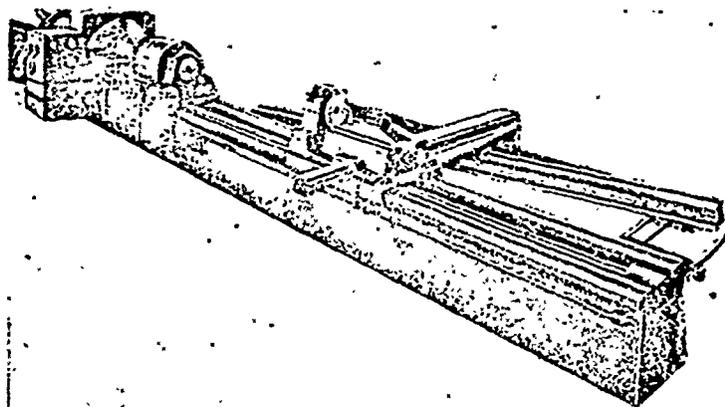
Machine for boring conic bores, whose drawing appears in Fig. 104
